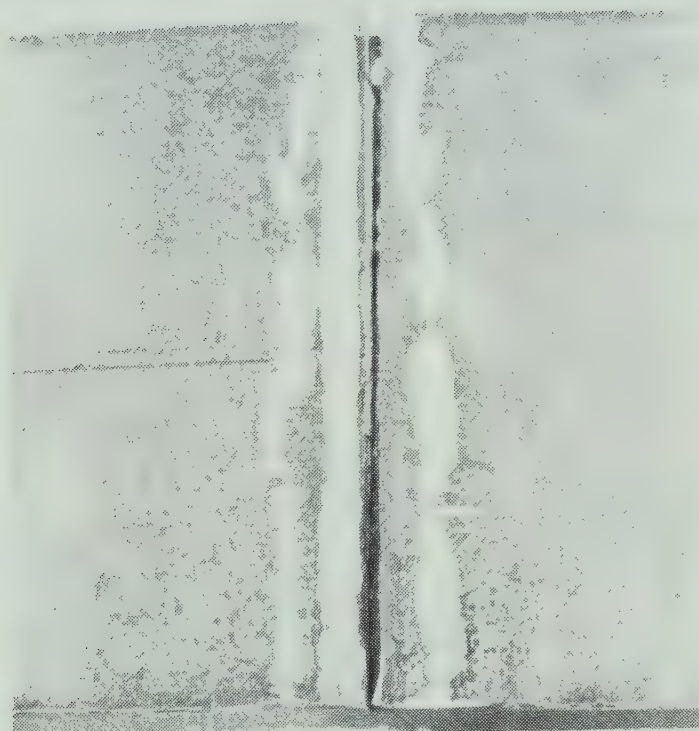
Failure Crack in Groove Weld with Backing Bar Specimen
